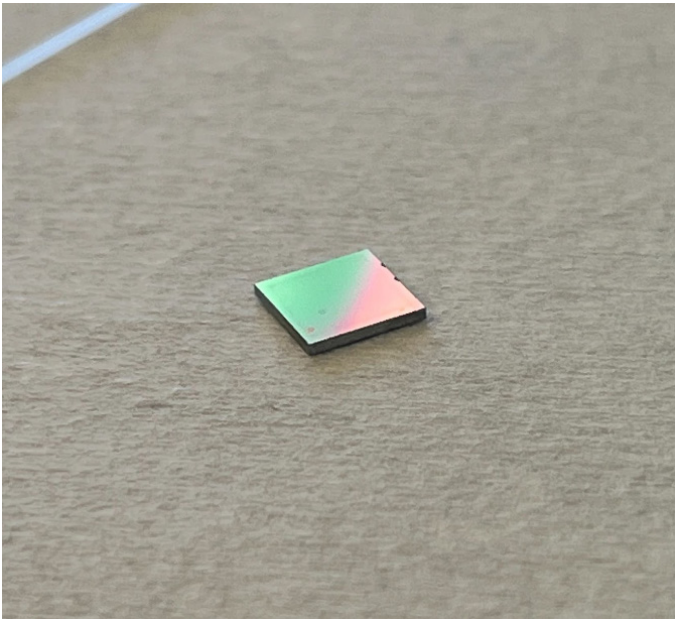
E7x7mm Valve Sample from Set 1 with Inconsistent Surface Finish.
